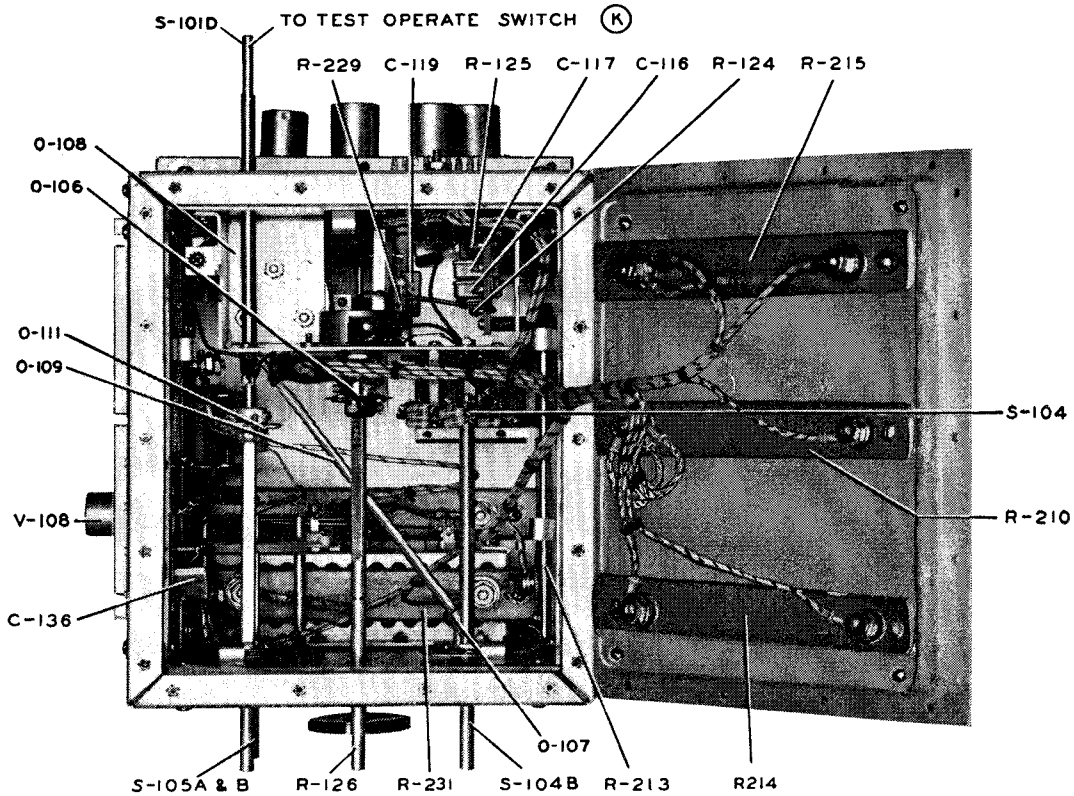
Keyer KY-30/GRT Oven Parts Arrangement, Bottom View
